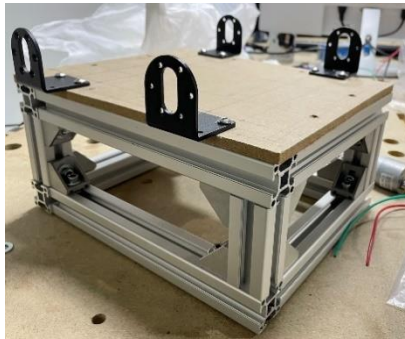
Robot Chassis with the Wooden Plate and Motor Brackets
